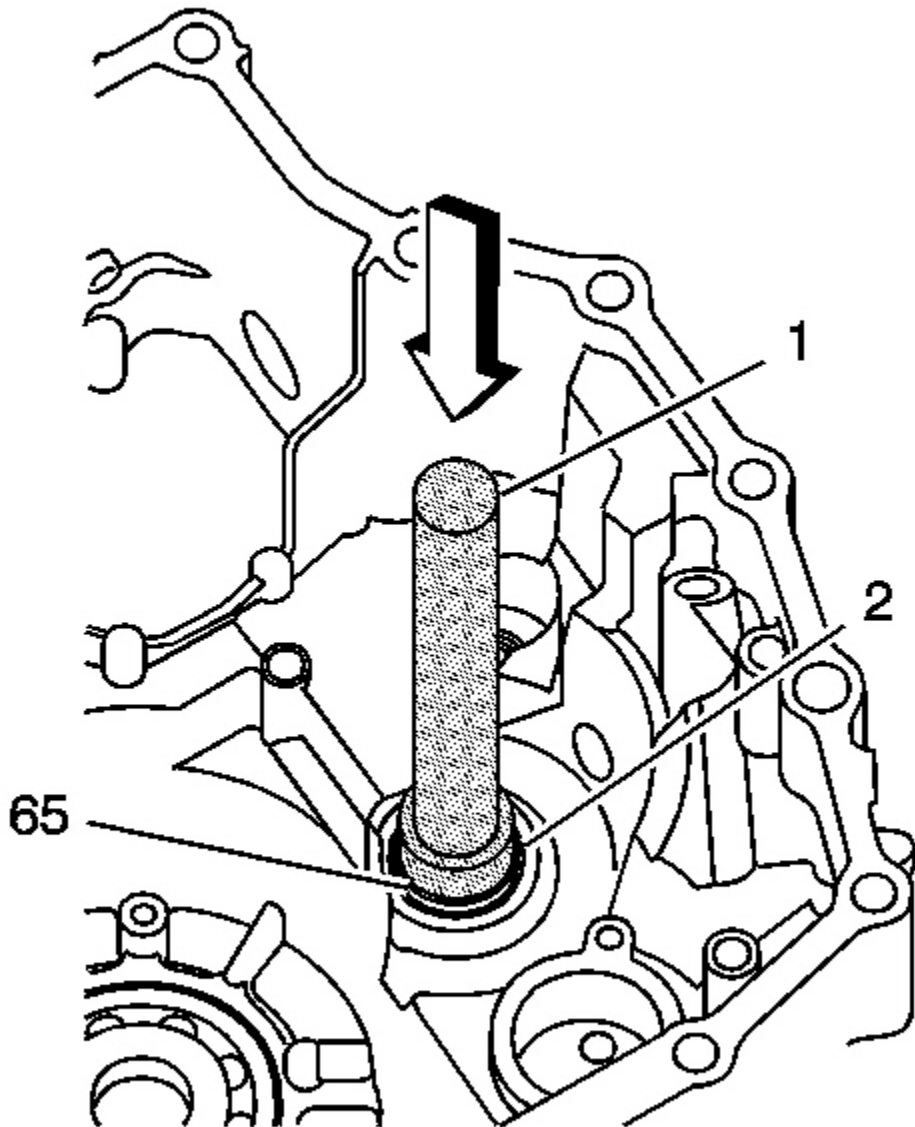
DT 46516, EN 46342 & 3rd Clutch Shaft Rear Bearing
